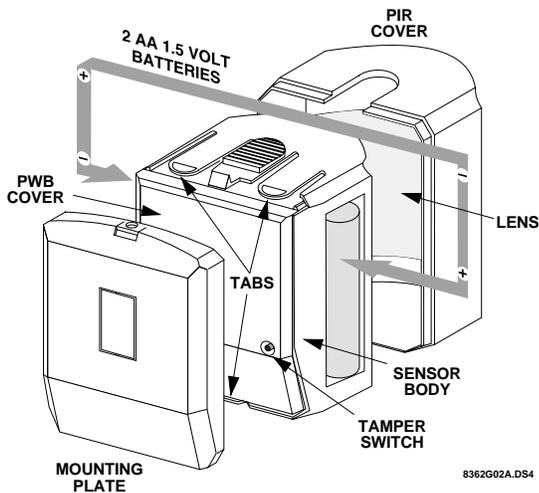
PIR Components, Battery Locations, & Tamper Switch
